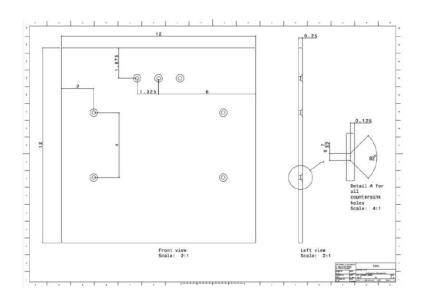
Design template for steel base plate drilling configuration. Each drilled hole is identical in diameter and countersink. Note that the two holes on either side are symmetrical and are constrained to the same dimensions, not displayed.
